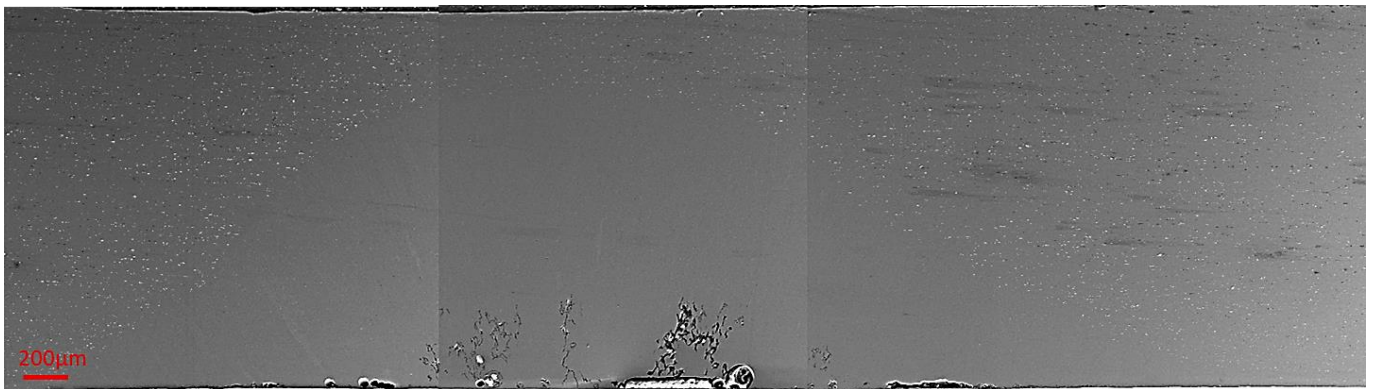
Cross section of a DP600 GA – 2AA6061 joint for 2x100ms pulse 2 kN electrode force and 14 kA with porosity and weld porosity induced crack. The bottom part of the images is the interface between the AA6061 sheet and DP600 GA joint. Note that DP600 GA steel part of the joint assembly is not shown here.
